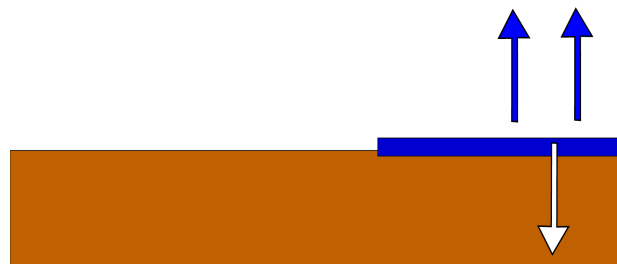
A cold weld where we see that the heat from the welding process goes in the direction of the white
